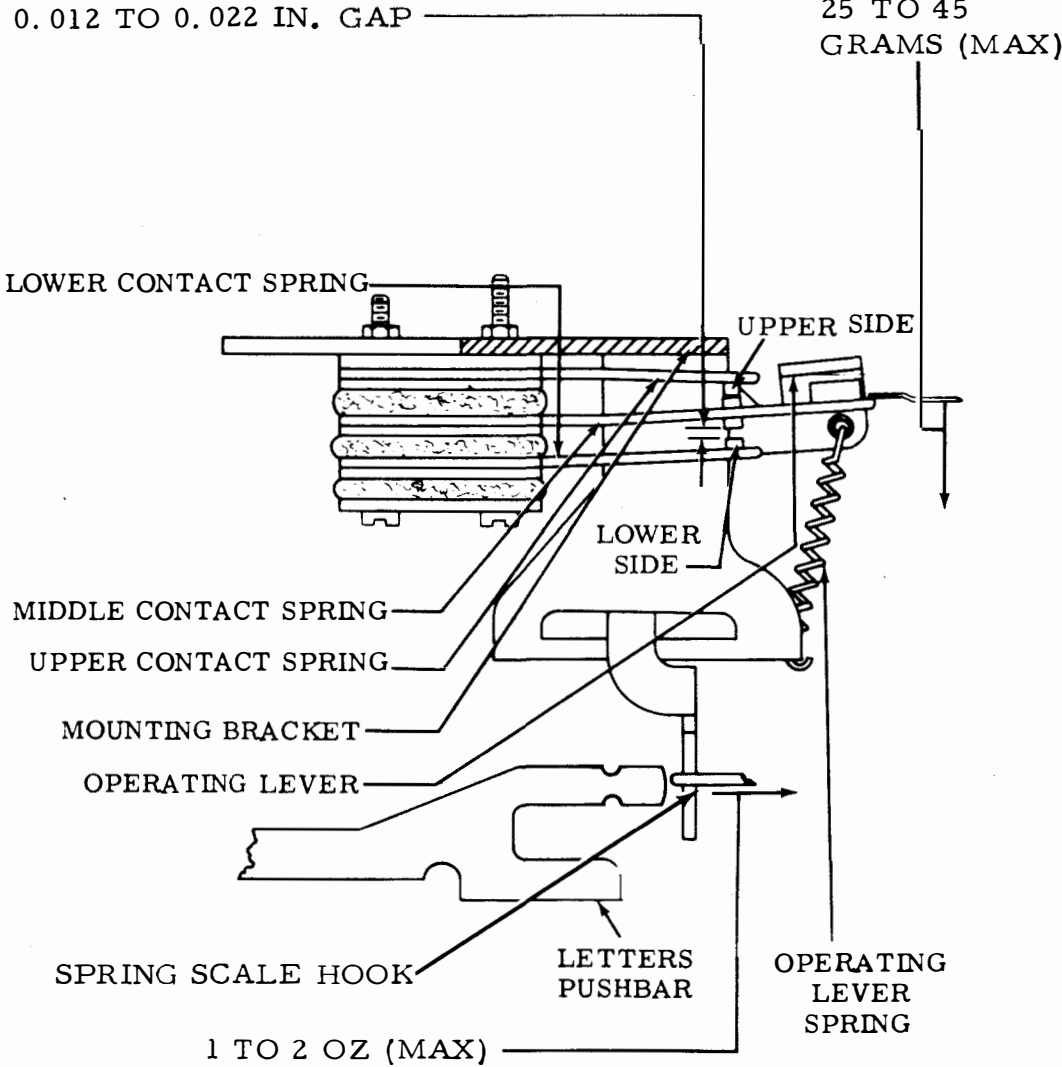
Middle Contact Spring, Lower Contact Spring, Operating Lever Spring, and Mounting Bracket
